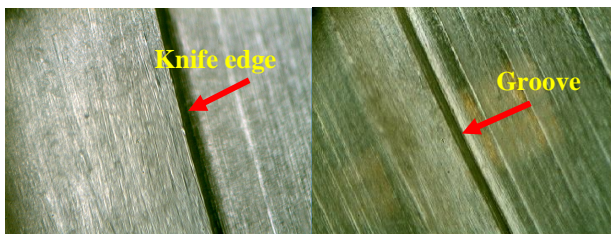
Close-up pictures of NbZr knife edge and niobium gasket groove. Both surfaces are less than ideal.
